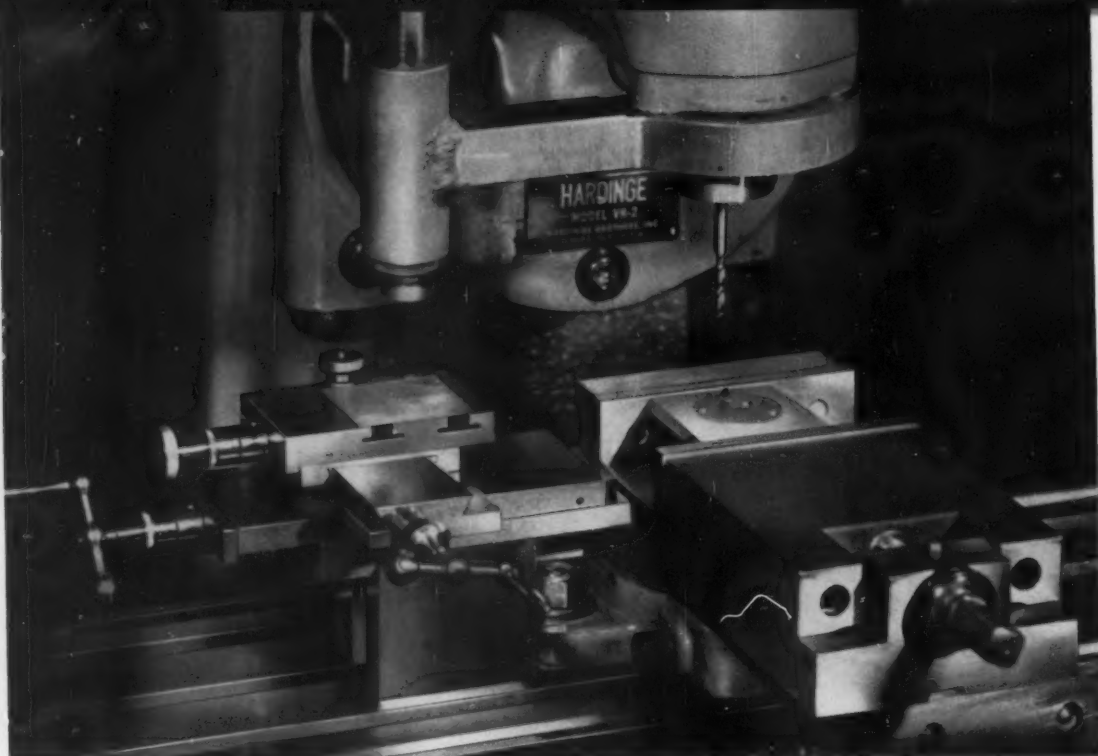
Low-power microscope is mounted on a bracket attached to vertical milling machine head to permit precise drilling and boring work.
